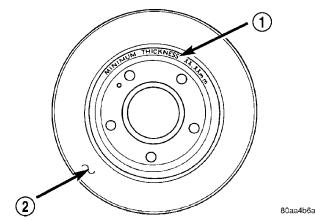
Minimum Brake Rotor Thickness (Typical)
